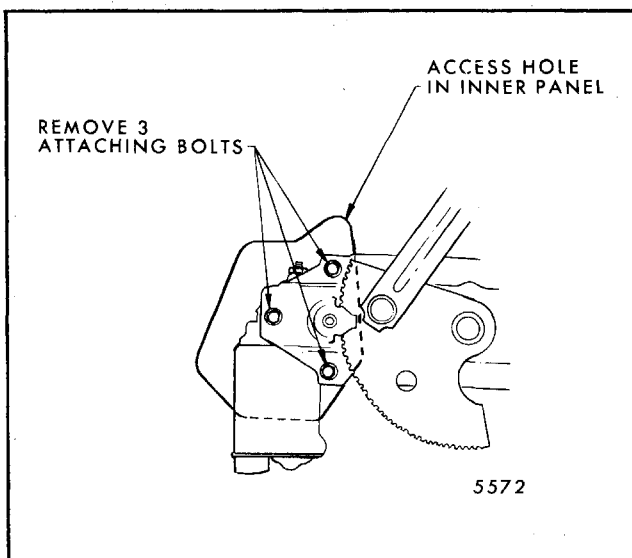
Front Door Electric Window Motor Viewed from Door Outer Panel Side - "A" Styles
